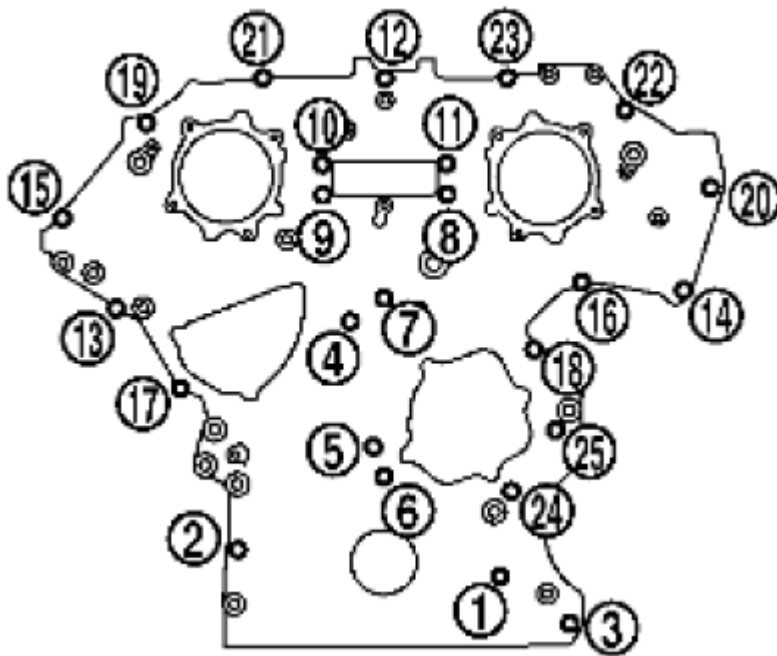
Identifying Front Timing Chain Case Bolts Loosen Sequence
